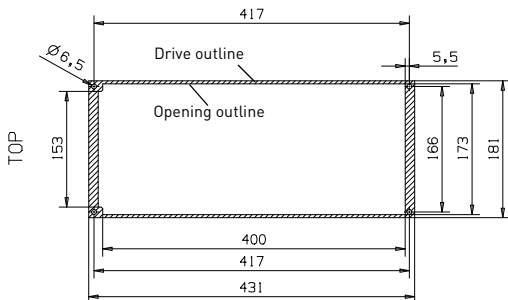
Flange mounting cutout dimensions for MI5 (Unit: mm)
